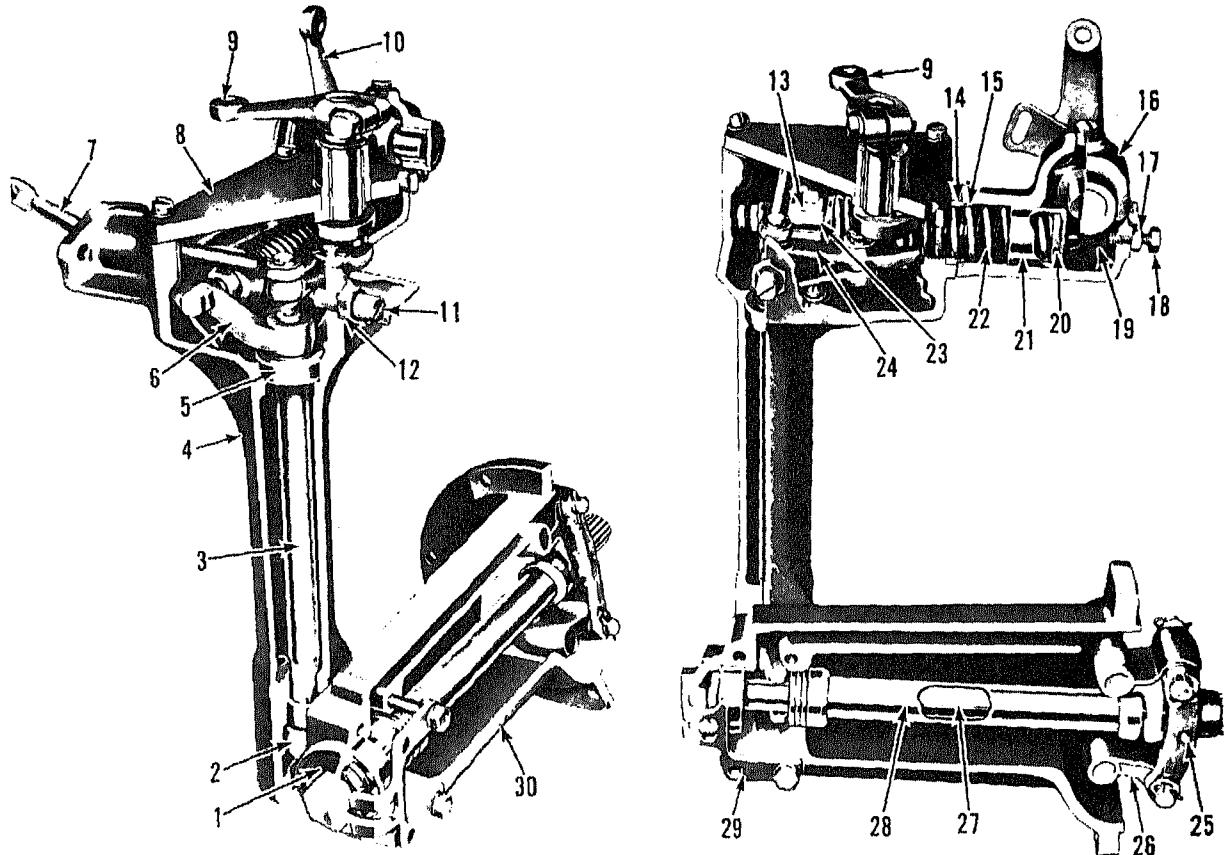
Accelerator-decelerator assembly, exploded view.
